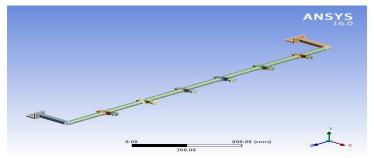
Static structural analysis of Modified paper support shaft assembly for Equivalent stress
